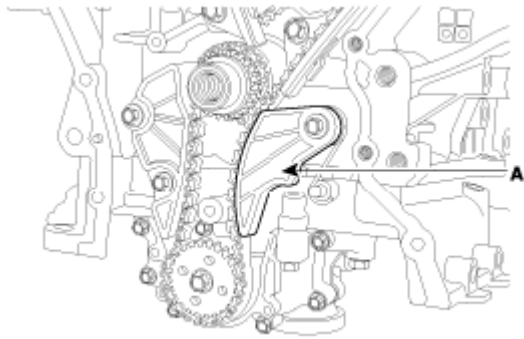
Identifying Oil Pump Chain Tensioner Assembly
